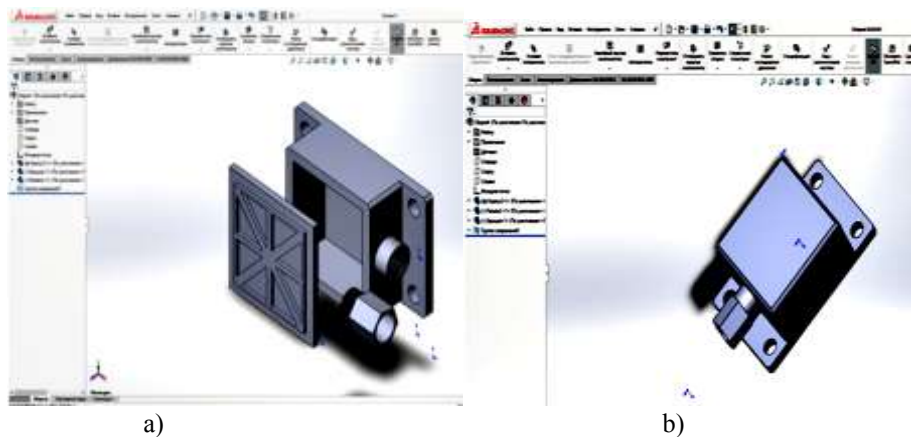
Assembly of the case geomagnetic sensor: a) assembly process; b) result of assembly
